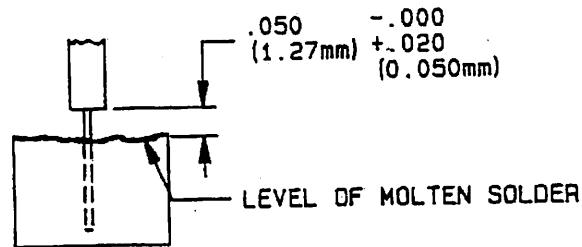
Example of axial wire-lead depth of immersion in molten solder.
